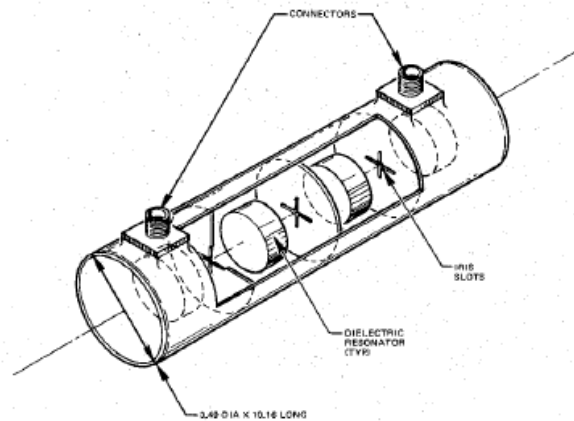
Axially mounted dual-mode DR filter configuration of [23].
